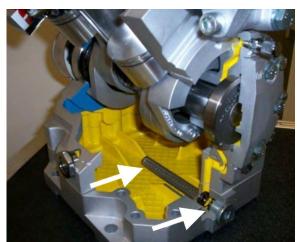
CUTAWAY VIEW SHOWING OIL
